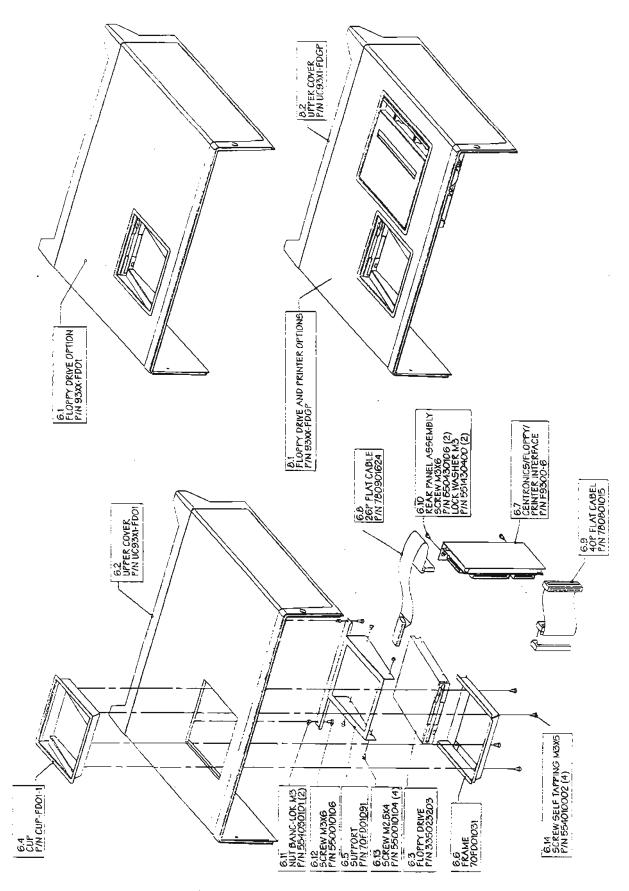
Floppy Drive Assembly P/N: 335023203
